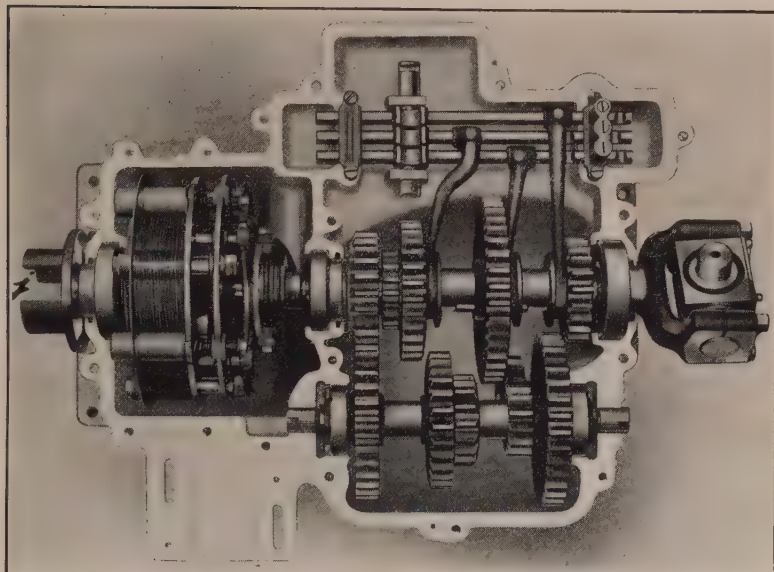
Winton. Multiple-disc clutch with transmission in one housing.
